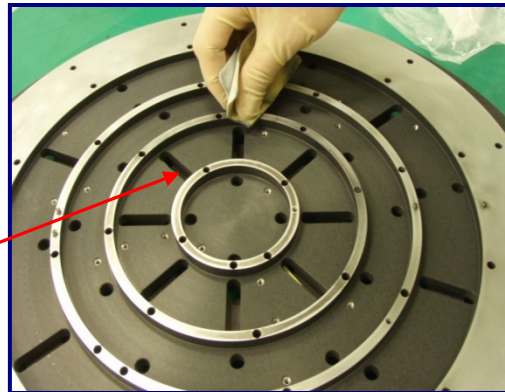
800 Grit Diamond ScrubPAD removing build-up on heater coils
